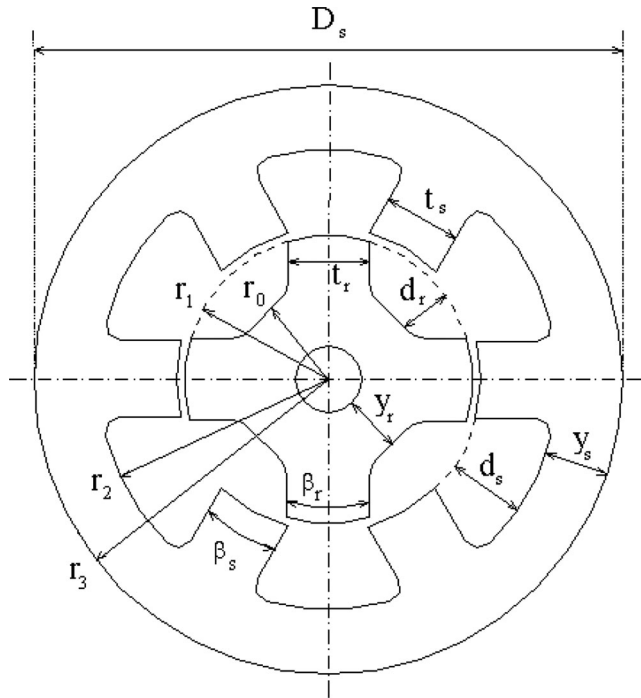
Stator and rotor dimensions of 6/4 classical SRM.
